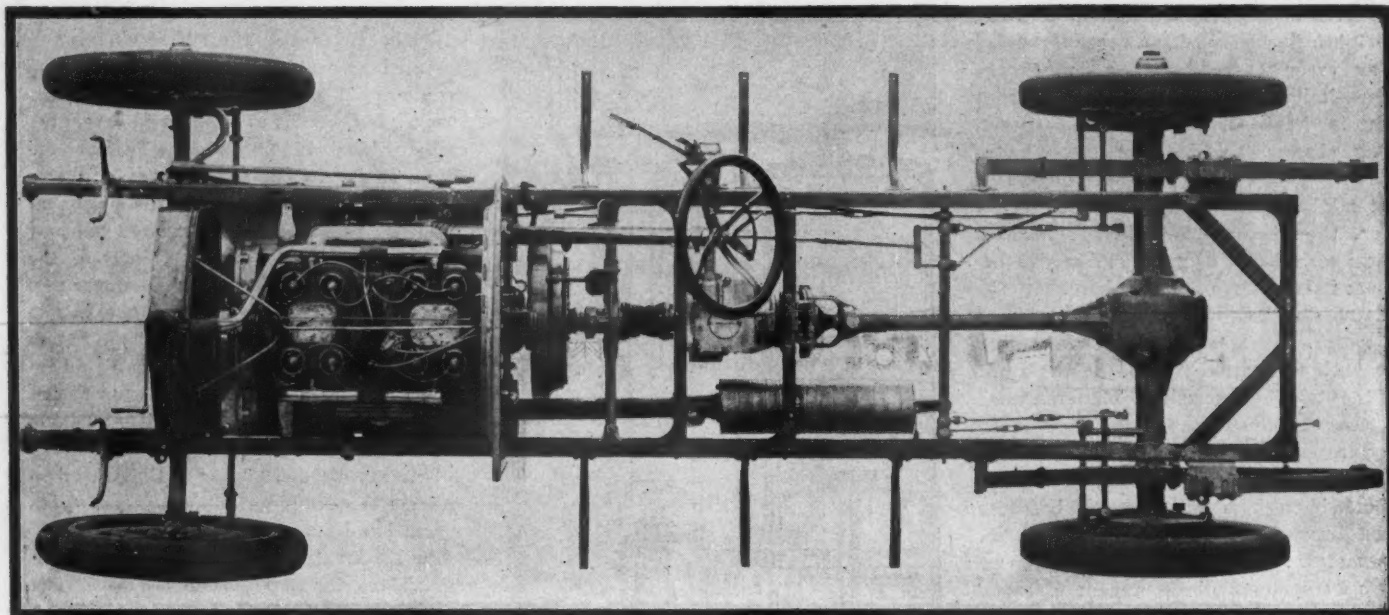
NATIONAL CHASSIS SHOWING TORQUE TUBE UNIT WITH REAR AXLE
